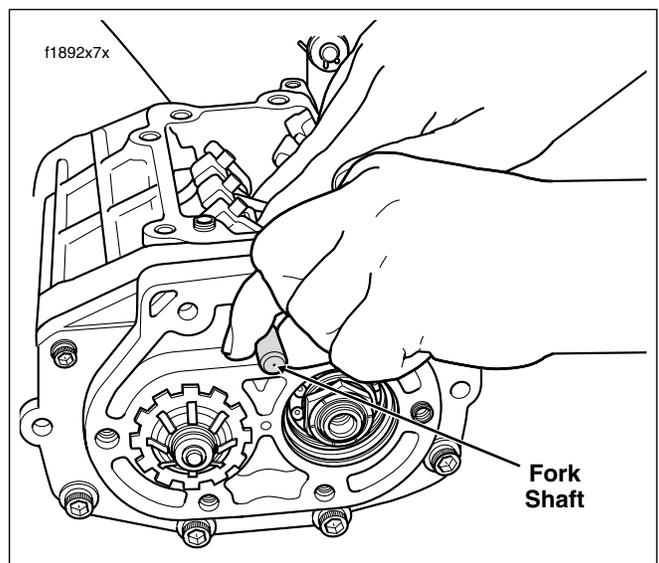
Remove Fork Shaft/Shifter Forks (Right Side View)
